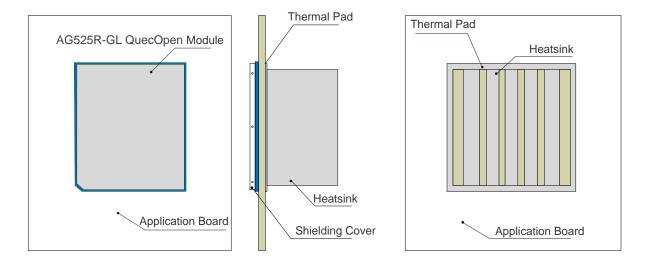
Referenced Heatsink Design (Heatsink at the Backside of Customers' PCB)
